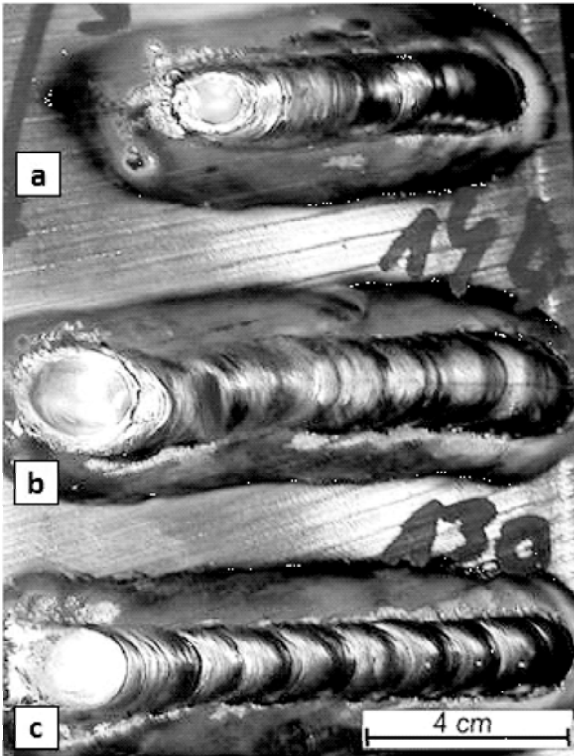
Faces of weld penetration for EN-MCMgRE3Zn2Zr alloy in delivery state conducted with additional wire in TIG method, welding current: a) 120A, b) 140A, c) 130A
